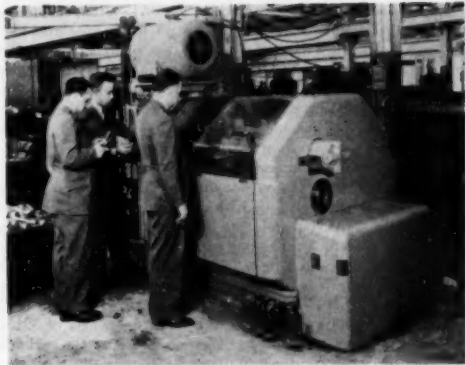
16-IN. FAY AUTOMATIC LATHE FOR MACHINING AUTOMOTIVE DRIVE PINION FORGING
